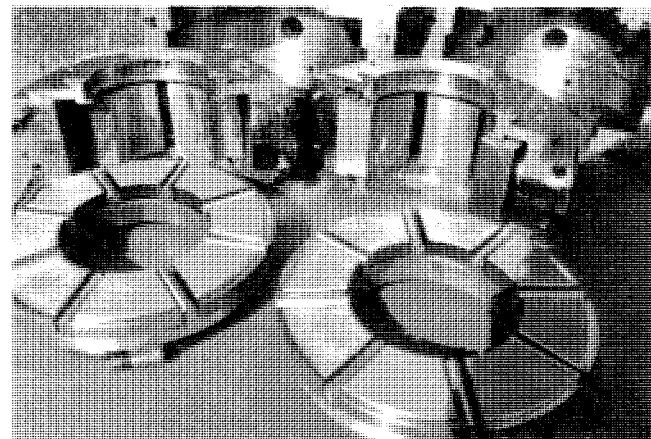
New Journal and Thrust Bearing Hardware for Compressor. Active and inactive thrust bearings, in foreground, show directed lubrication nozzle manifolds between the pads.
